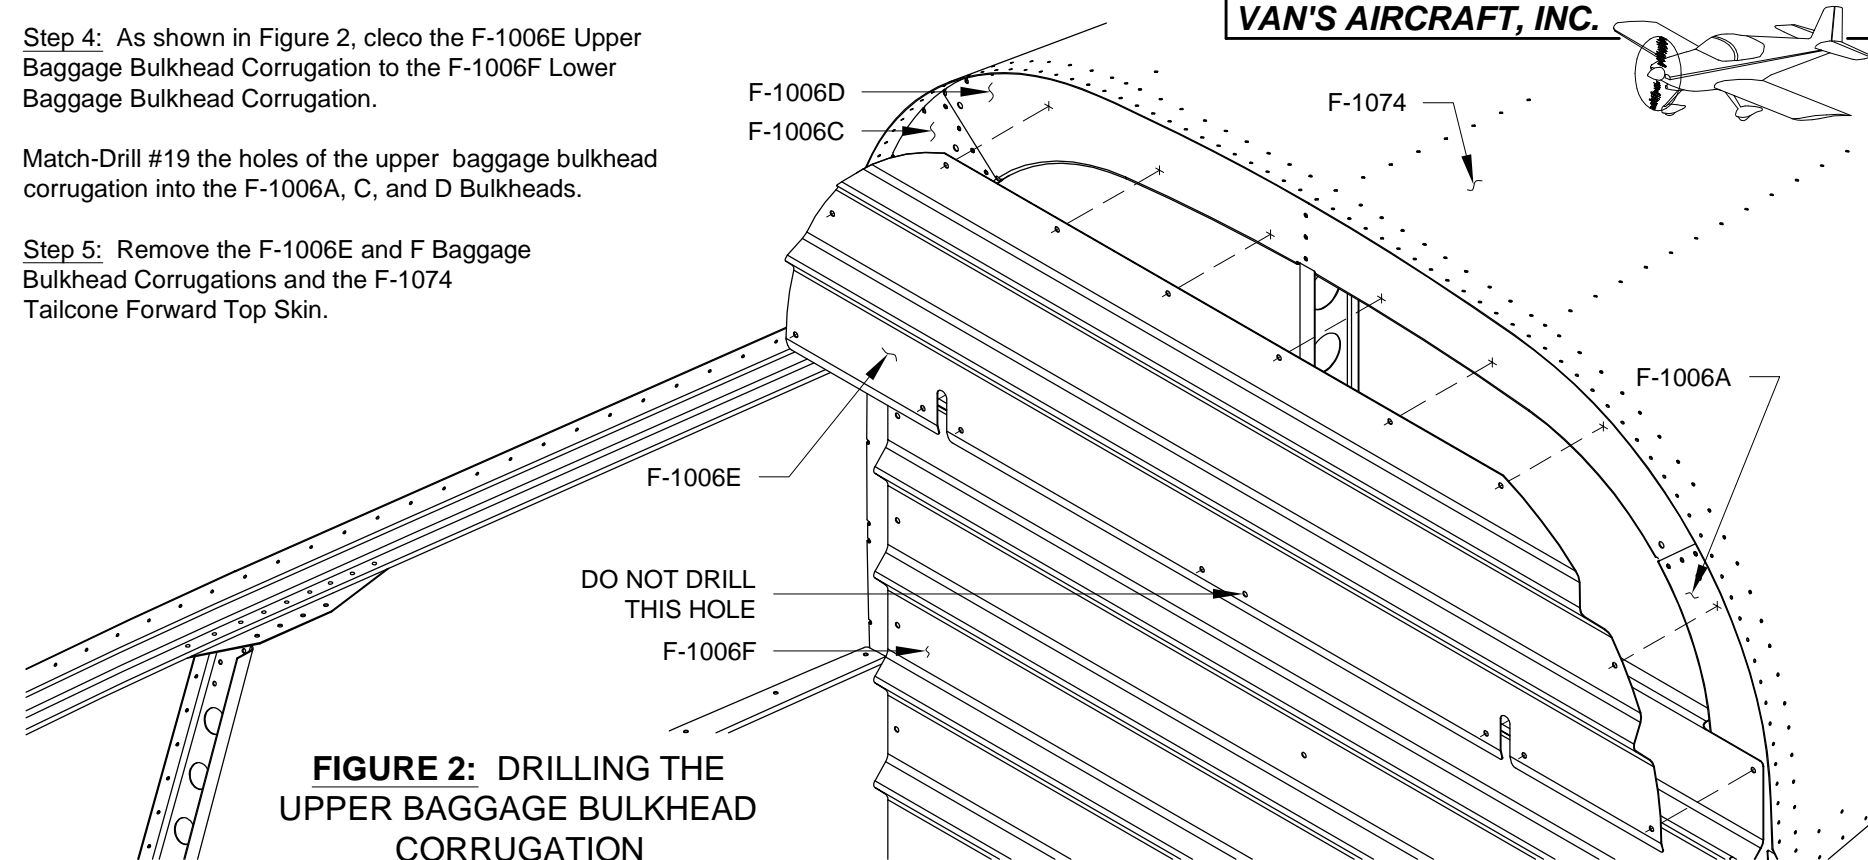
DRILLING THE UPPER BAGGAGE BULKHEAD CORRUGATION
